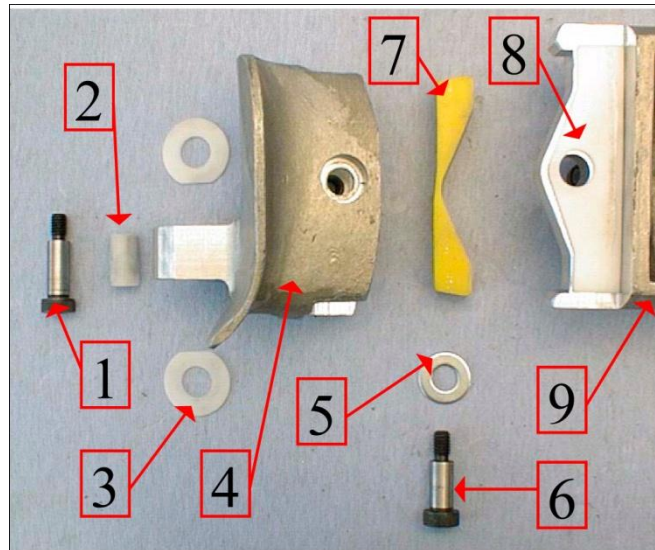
CLAVICLE LINK, EXPLODED VIEW
